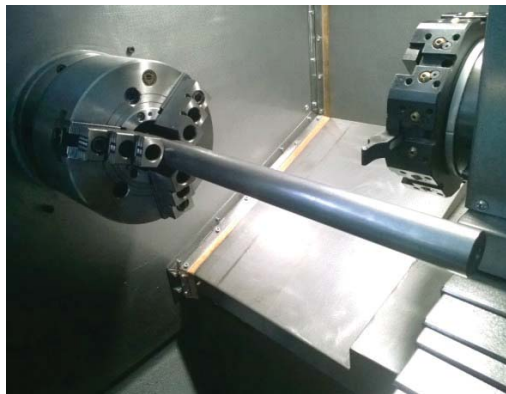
Test setup: workpiece mounted in a 3-jaw lathe chuck
